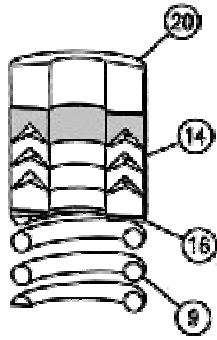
Spring Loaded PTFE V-Ring Packing Kit P/N 24494T001 (Standard)
